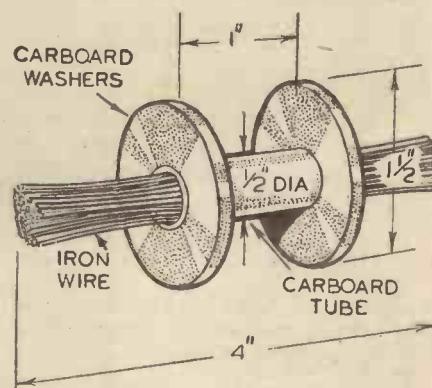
Details of the bobbin and core for the iron-core choke.
